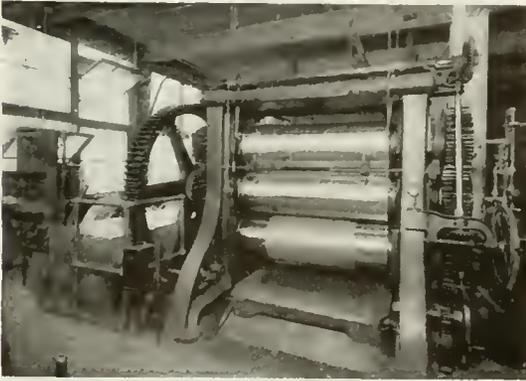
40-h.p., 400,800-r.p.m., 220-volt Direct-current Motor Driving a 22- by 60-in. Rubber Calender
